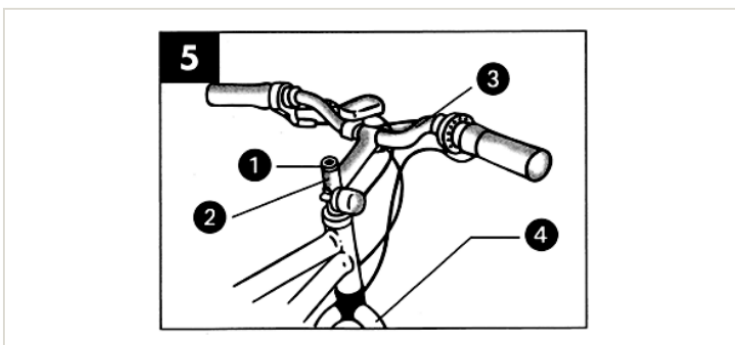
1 stem adjusting bolt · 2 stem · 3 centring · 4 fork
